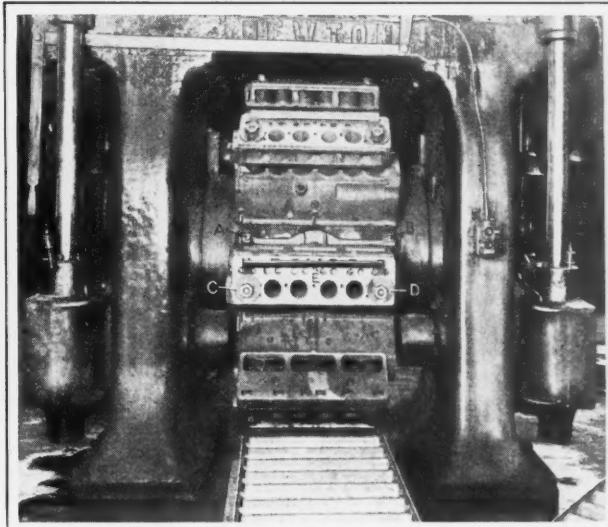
Continuous Milling Operation in which Both Ends are Rough- and Finish-milled
